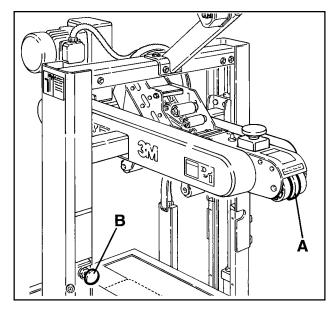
Mechanical Latch, Upper Drive Assembly
